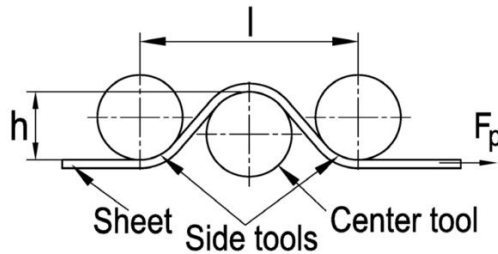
Schematical drawing of Draw Bead Test (DBT) [46].
